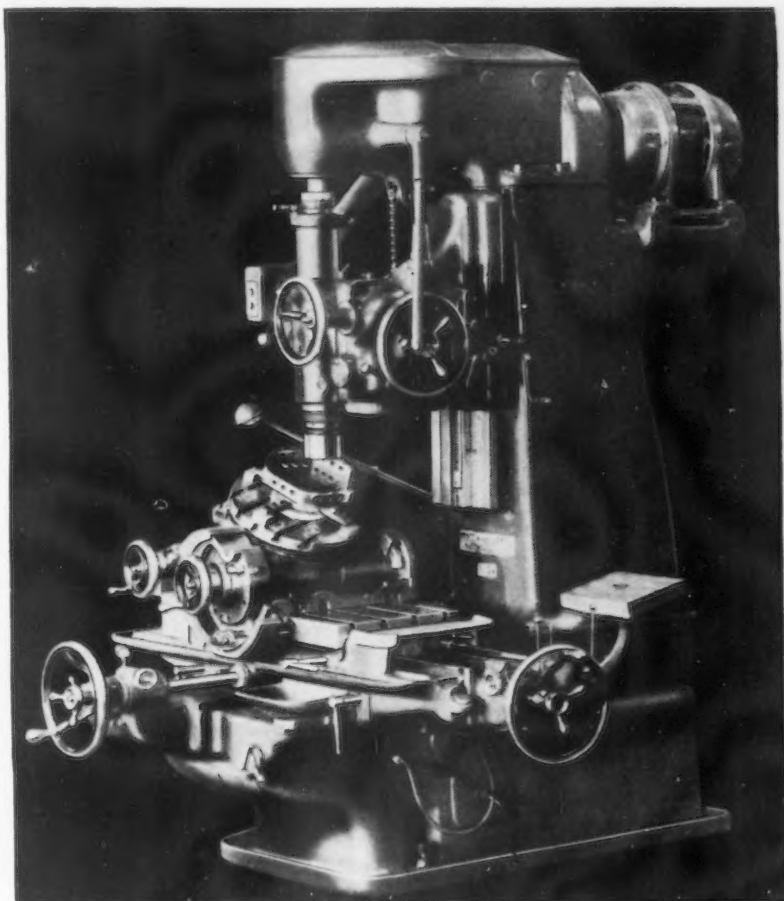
This jig boring machine, the new Pratt & Whitney No. 2A, has speeds up to 1800 r.p.m. and features a "shockless" insulated motor and spindle drive.
